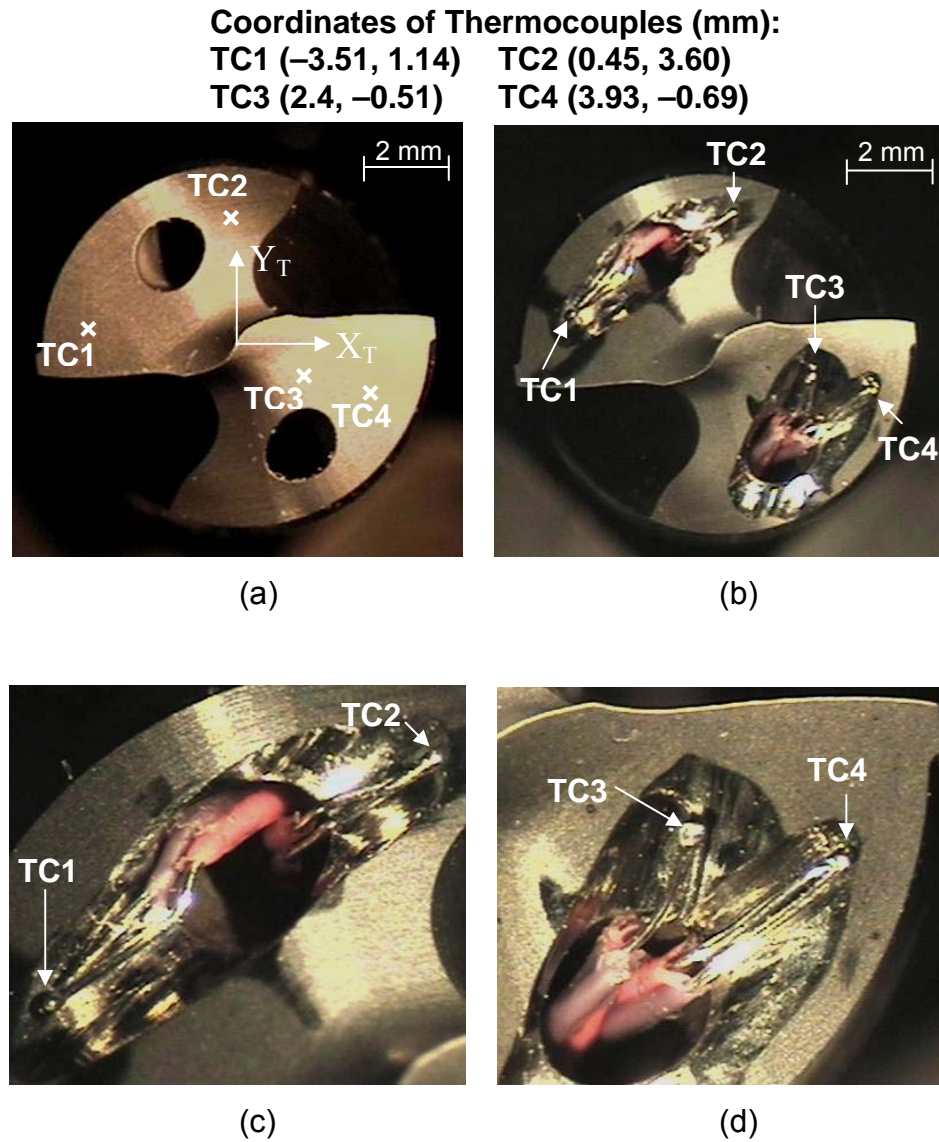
The spiral point drill and thermocouple locations in the drill flank face: (a) original drill, (b) drills with thermocouples embedded, (c) close-up view of TC1 and TC2, and (d) close-up view of TC3 and TC4.
